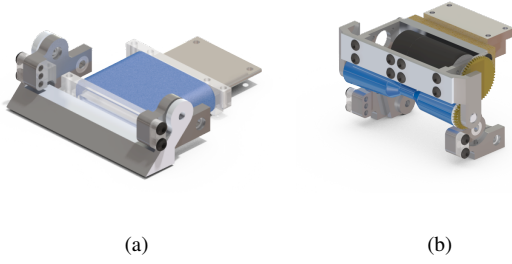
(a) Chip Kick assembly view (b) Damper system views
